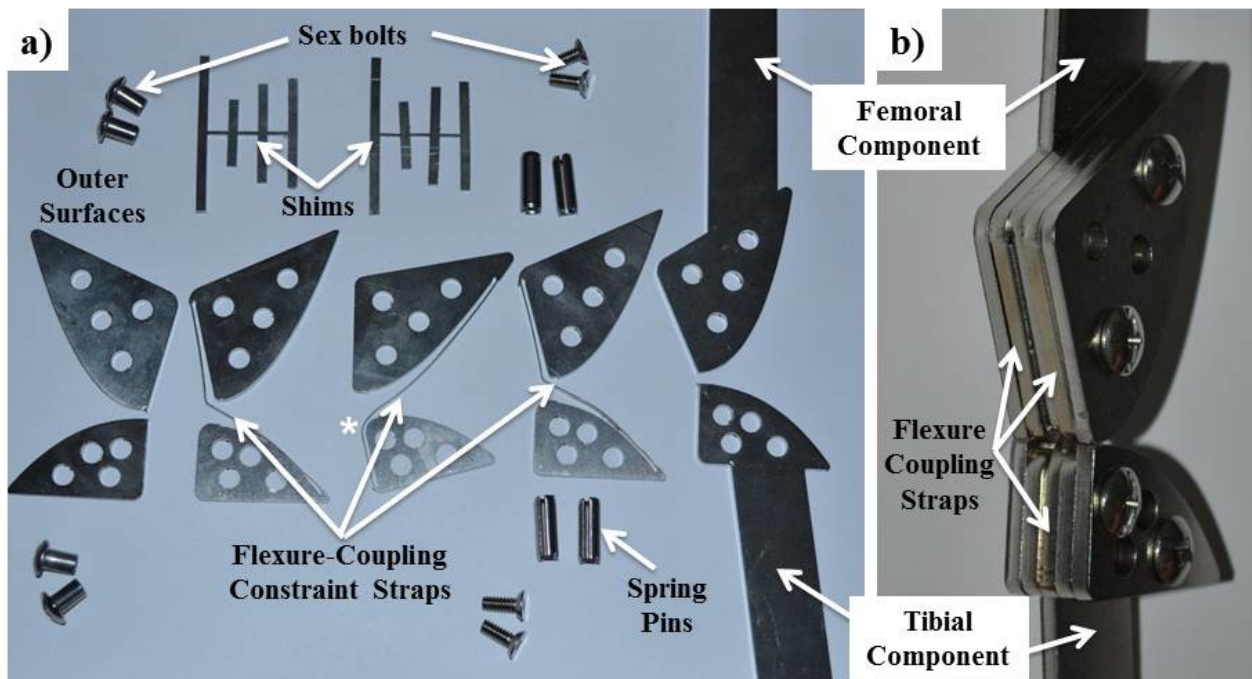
(a) Exploded view of components for the stainless steel rolling-contact joint seen in Figure 5.1; (b) Isometric view of the assembled prototype.
